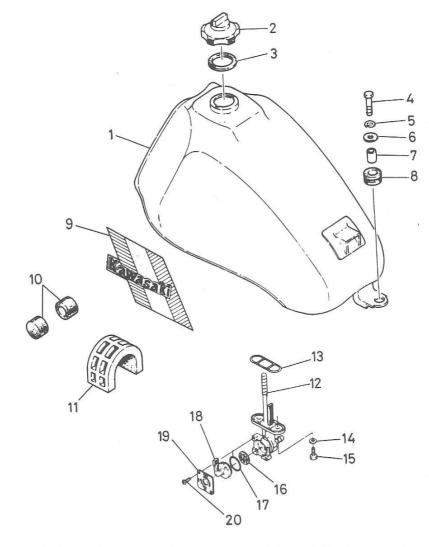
Fuel tank and tap - KLT110 and 160 (Sec 2)
